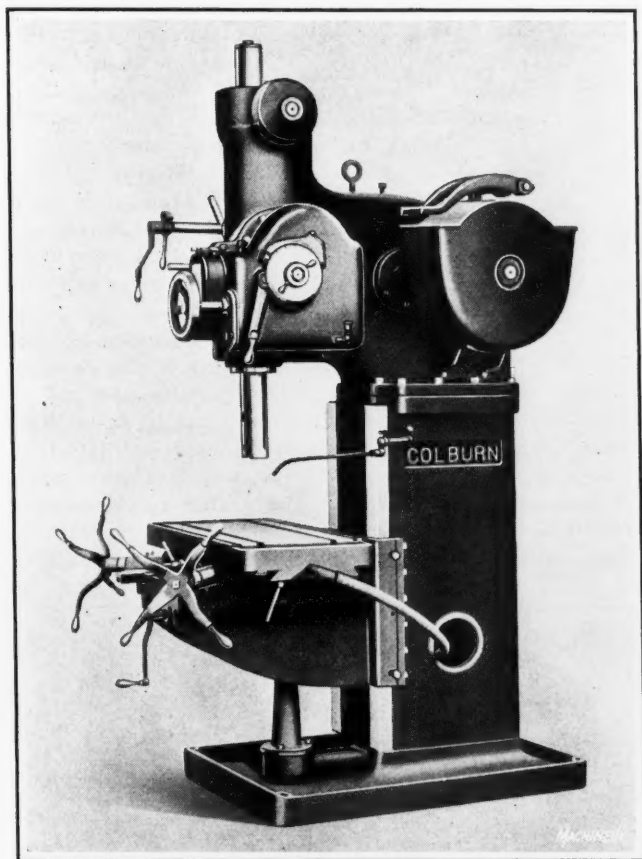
Single-spindle Heavy-duty Drilling Machine made by the Colburn Machine Tool Co.
